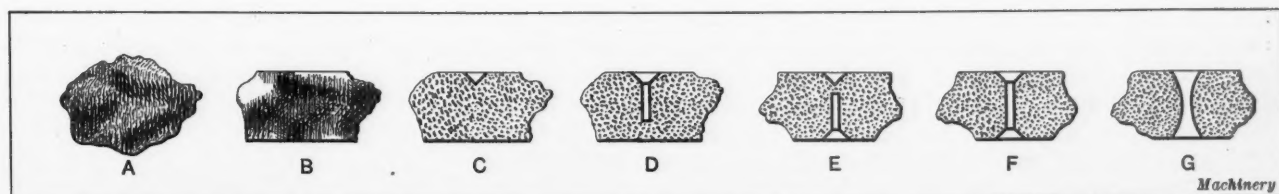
Rough Diamond A and Cross-sectional Views showing Successive Steps in the Process of making Wire-drawing Die
